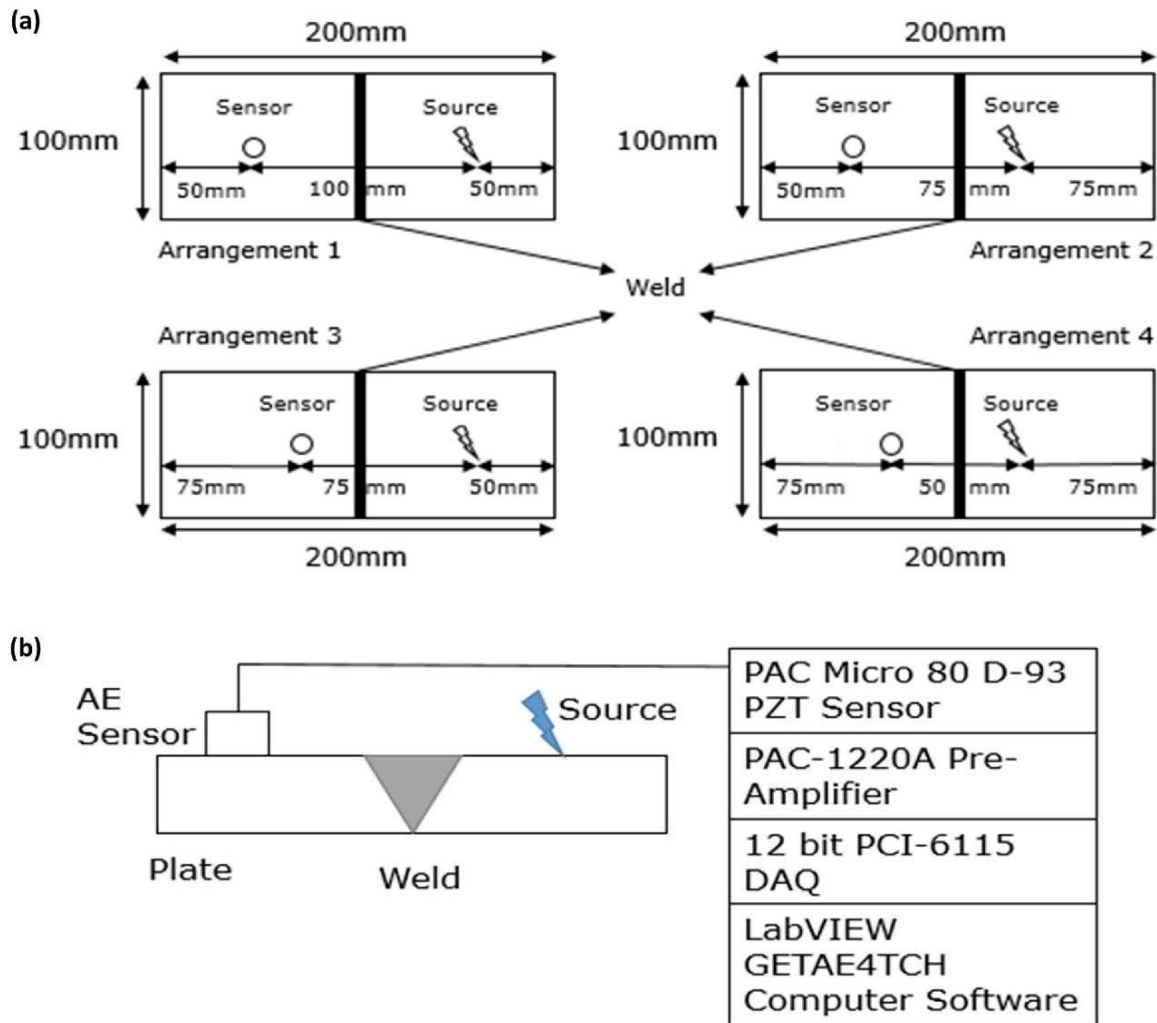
(a) Schematic layout for welding specimen showing each arrangement of AE sensor and PLB source, and (b) AE measurement system.
